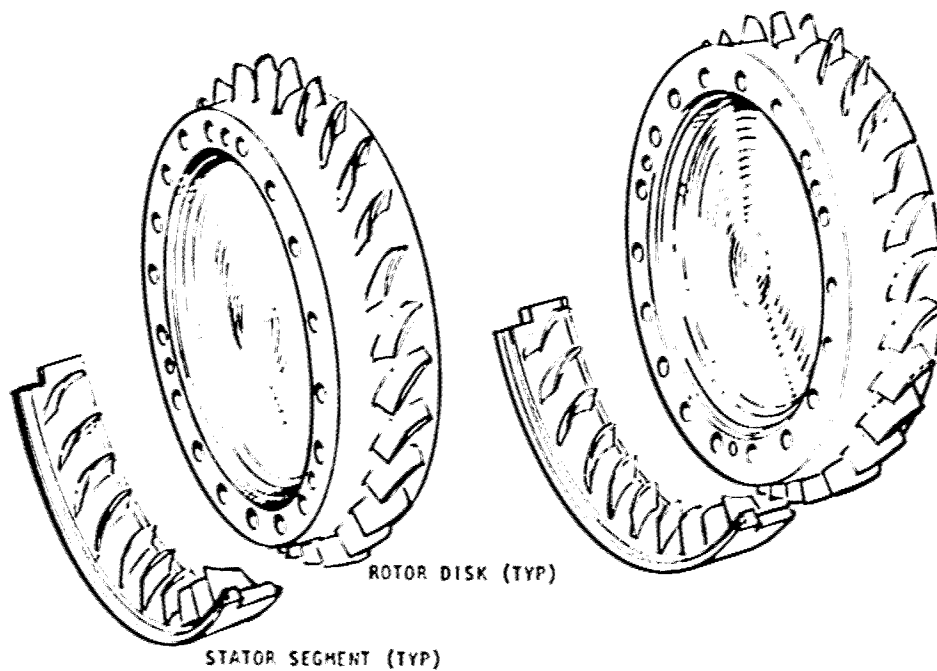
Stator segments and rotor disks for Mark 9 pump
